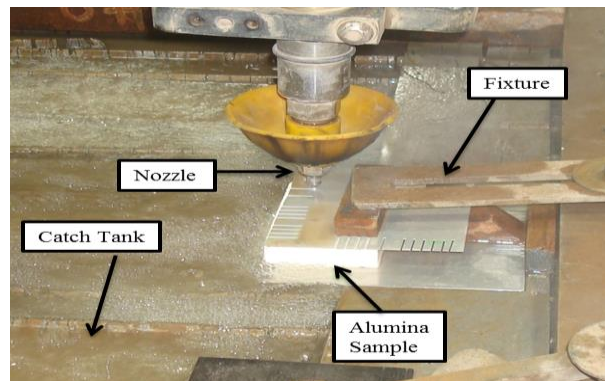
Abrasive waterjet machining at Al_2O_3 sample.
